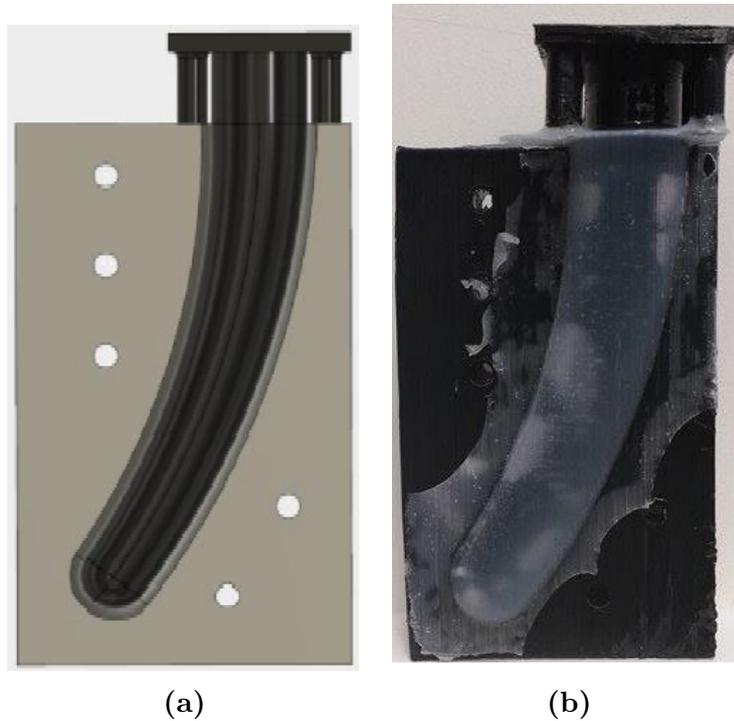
Longitudinal schematic of both molds: (a) 3D design; (b) Real picture after curing.
